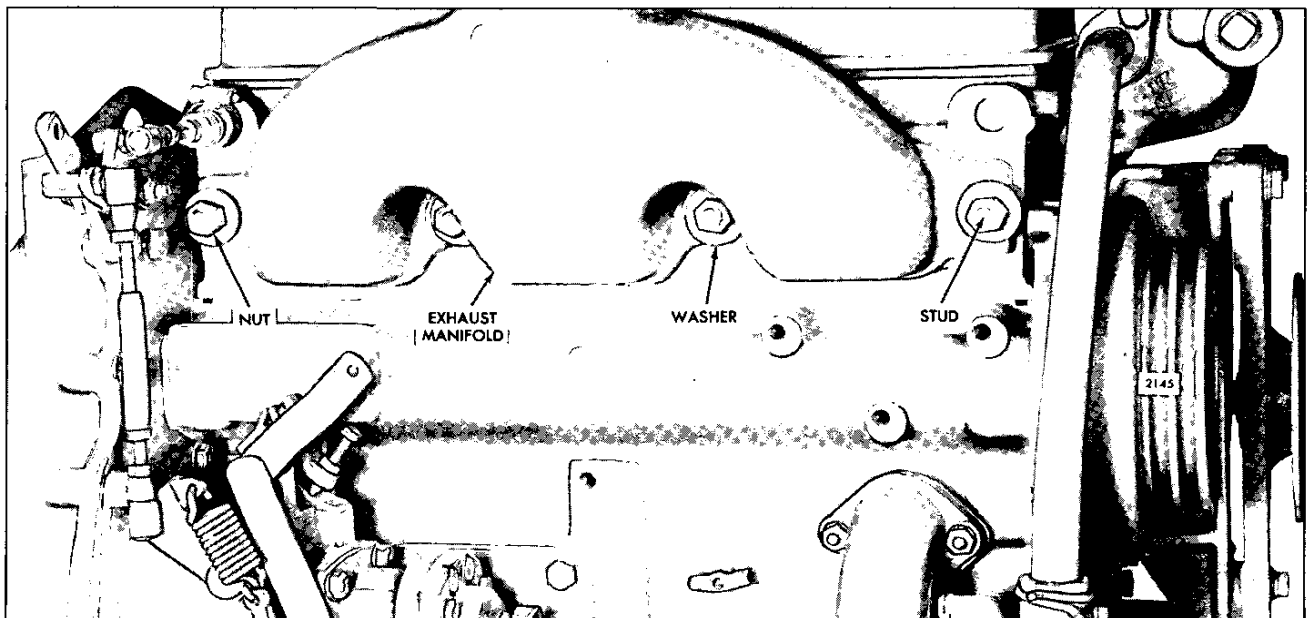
Typical Air-Cooled Exhaust Manifold (Square Flange) Mounting
